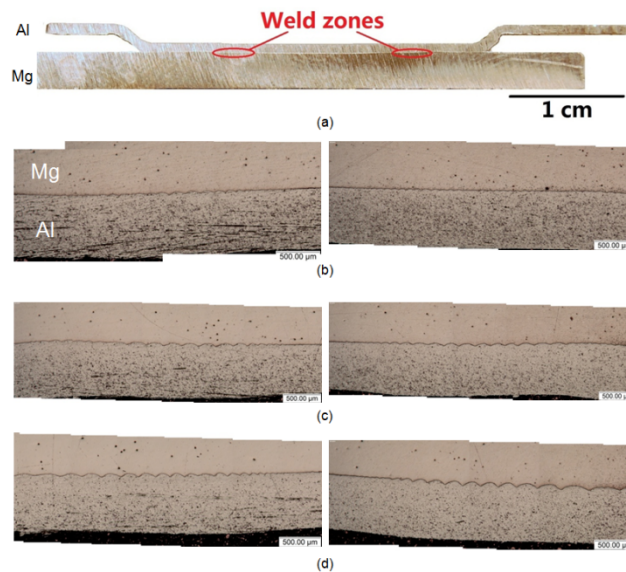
Cross section of AA6061T4/AM60B welds: (a) macroscopic view, showing the left and right weld zones. Both weld zones are shown for samples welded at (b) 6 kJ, (c) 8 kJ, and (d) 10 kJ input energy.
